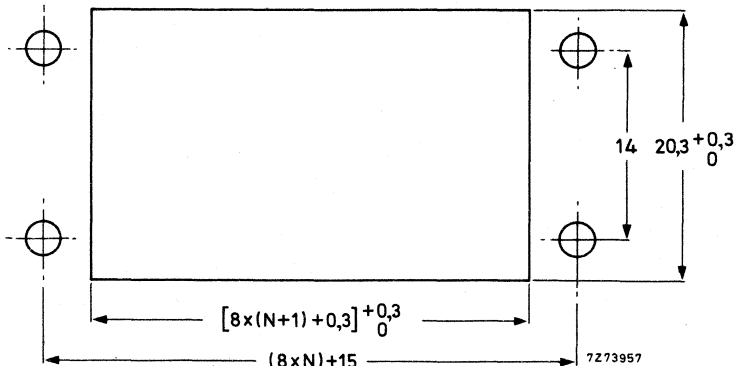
Panel cut-out for switches and end-pieces for mounting with four M3 screws.
